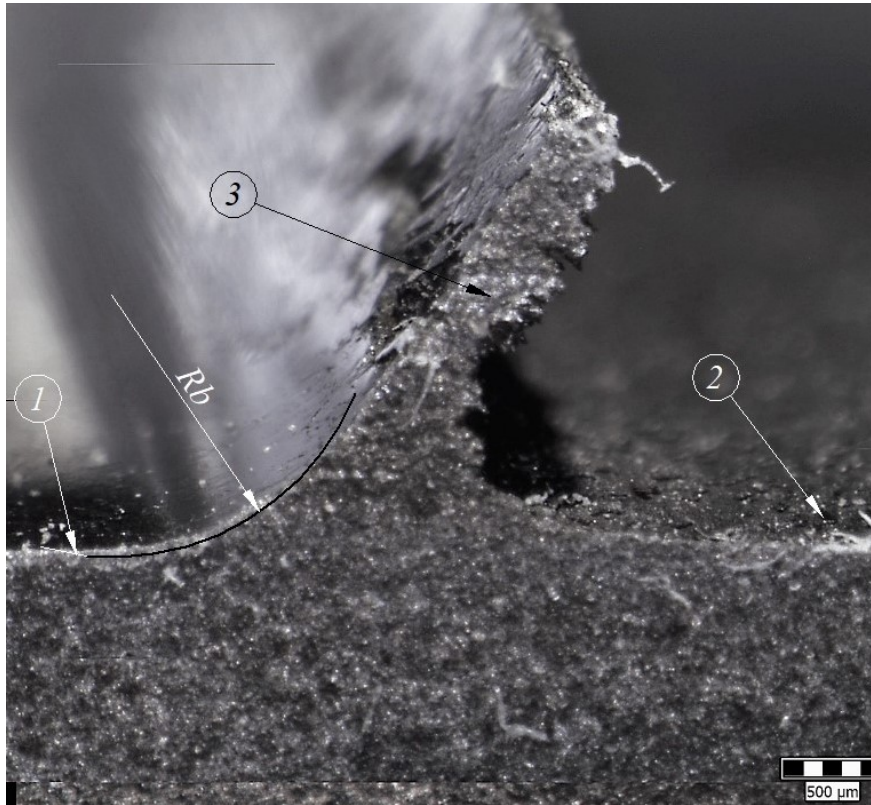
Photograph of cross-section place of burnishing surface with force $F=1150N$: 1- burnished surface, 2- surface before burnishing, 3- pushing material in a front of the roller, R_b - radius of burnishing tool.
